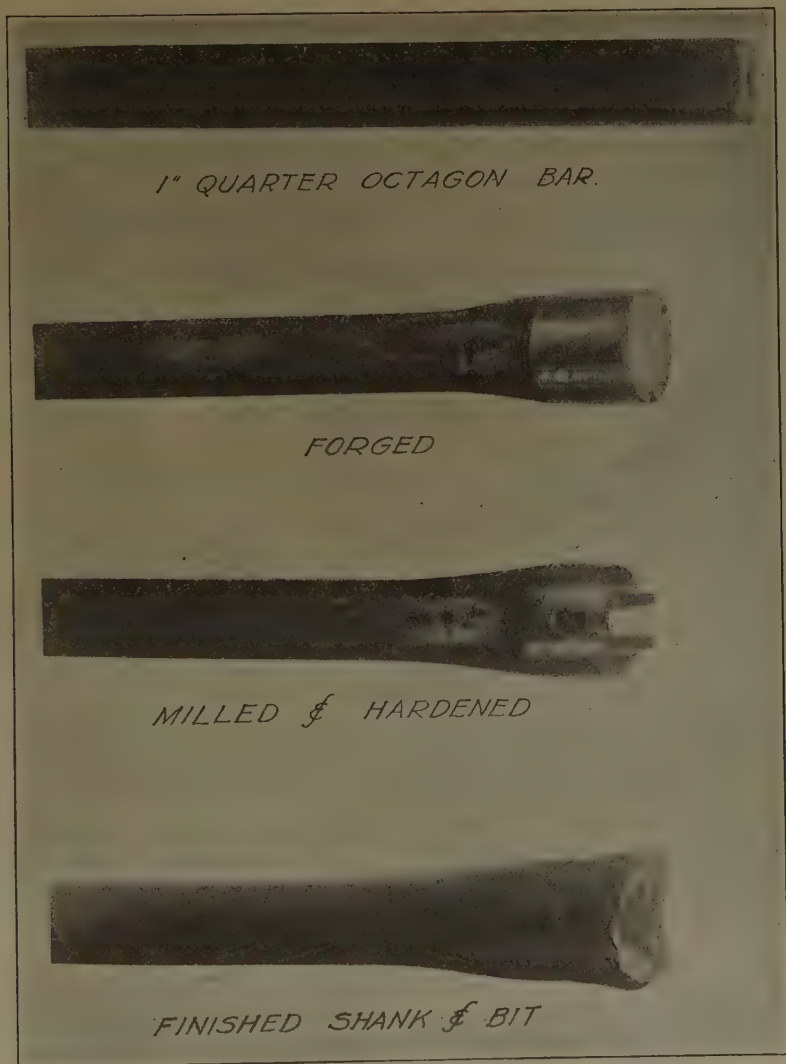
STEPS IN MANUFACTURING SHANK AND BIT.
